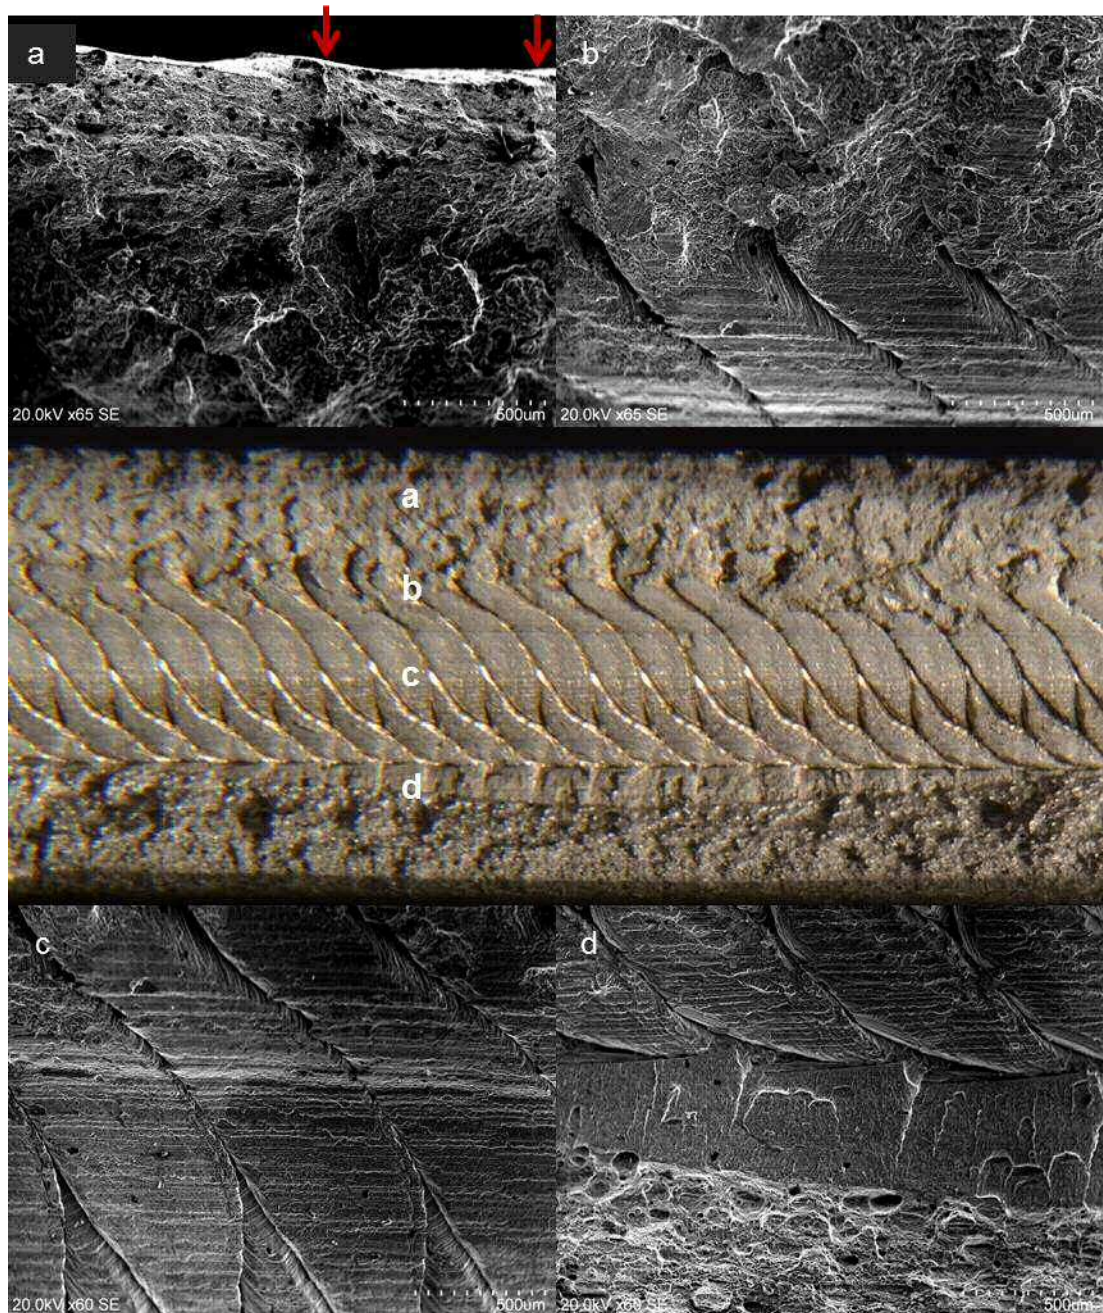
SEM examination of fast weld fatigue sample's fracture path (AD side)
